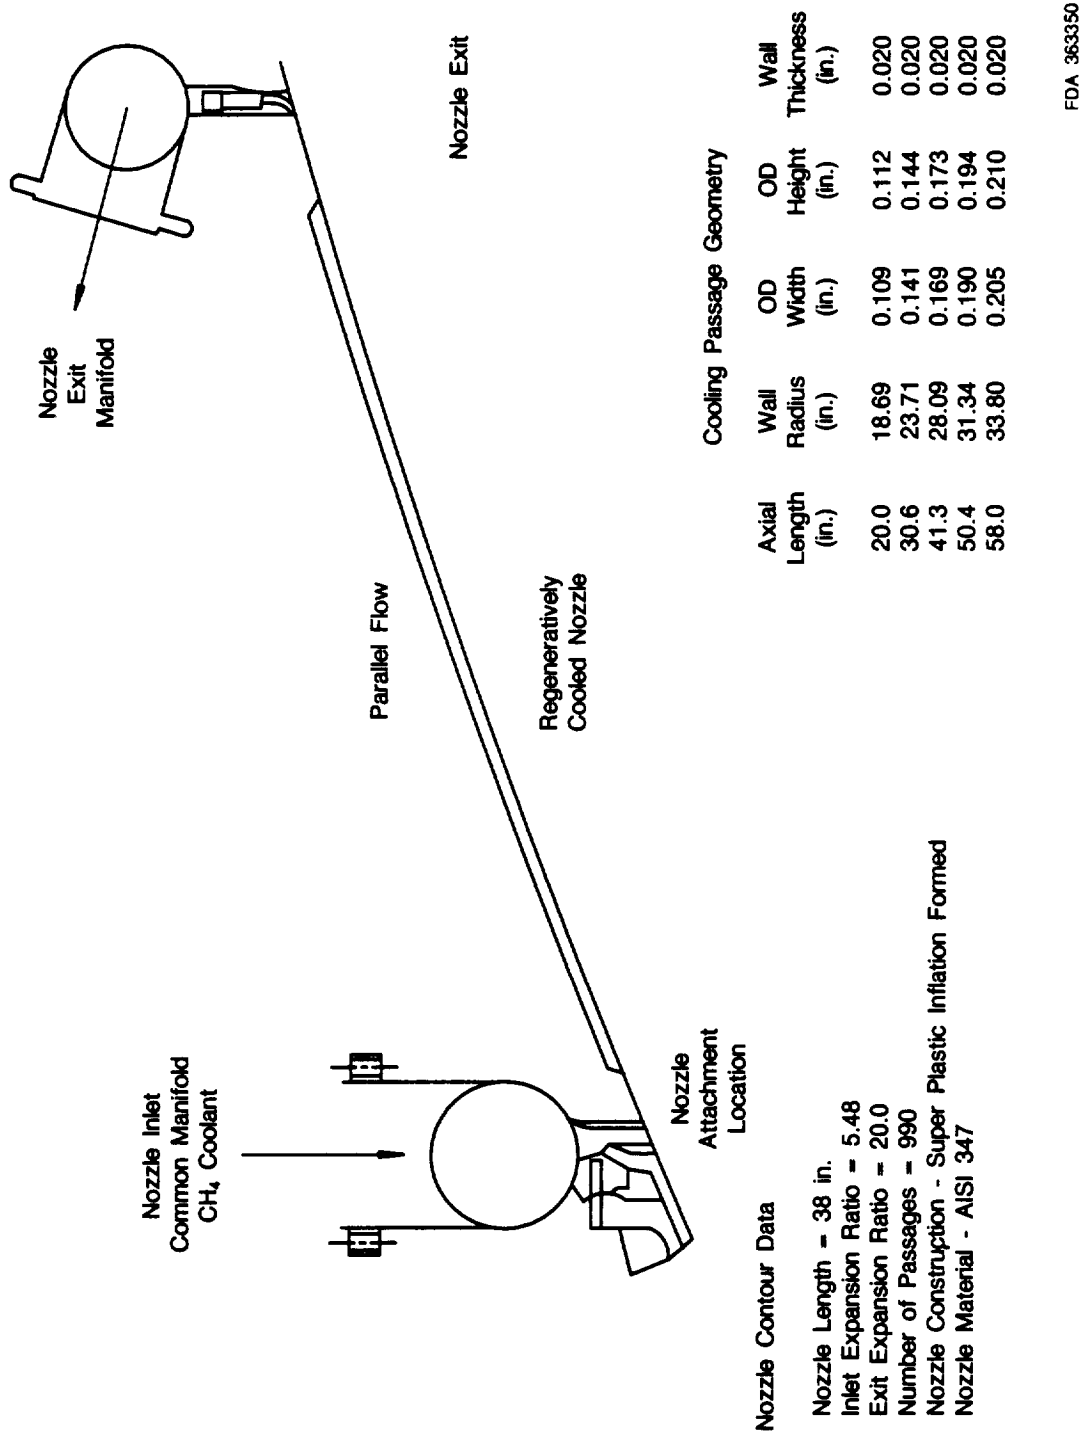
STBE Unique Gas Generator Nozzle Cooling Design Configuration
